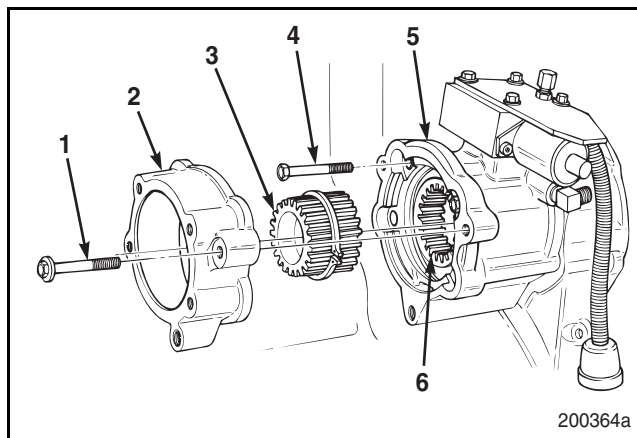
Econovance Housing Removal (Pre-1992 Style Shown)
